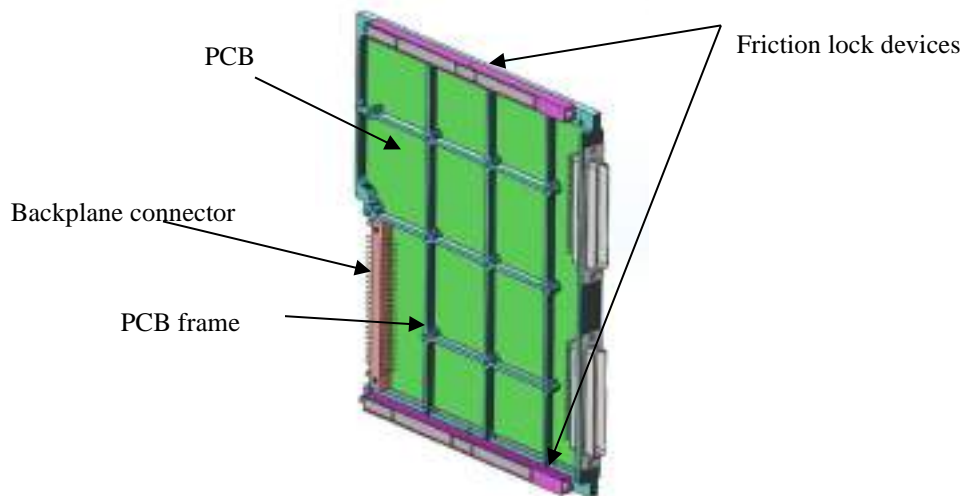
PCB on AA6082-T6 PCB frame with QTY 2 friction locking devices (NVENT).
